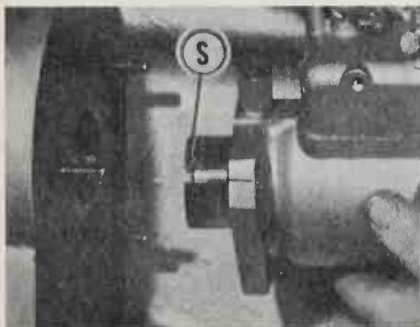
View of slot (S) which must engage pin in pump gear.
